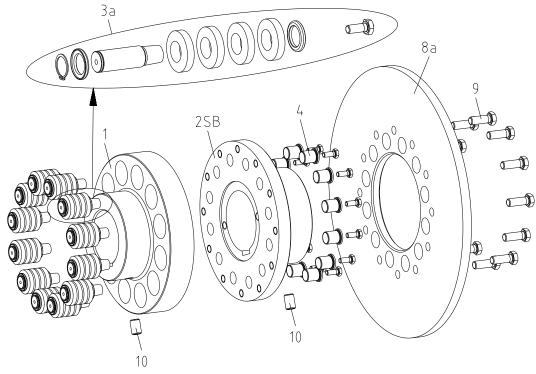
REVOLEX® type KX – SB (taper pin design B)
